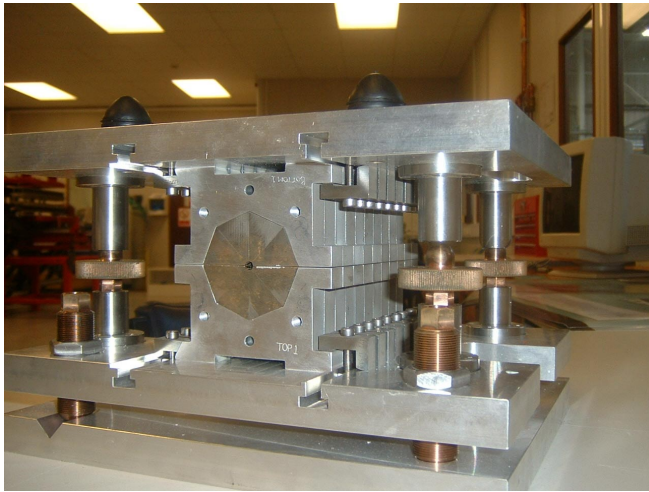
(Color) Photograph of completed PM ring undulator assembly, with ten 14 mm periods.
